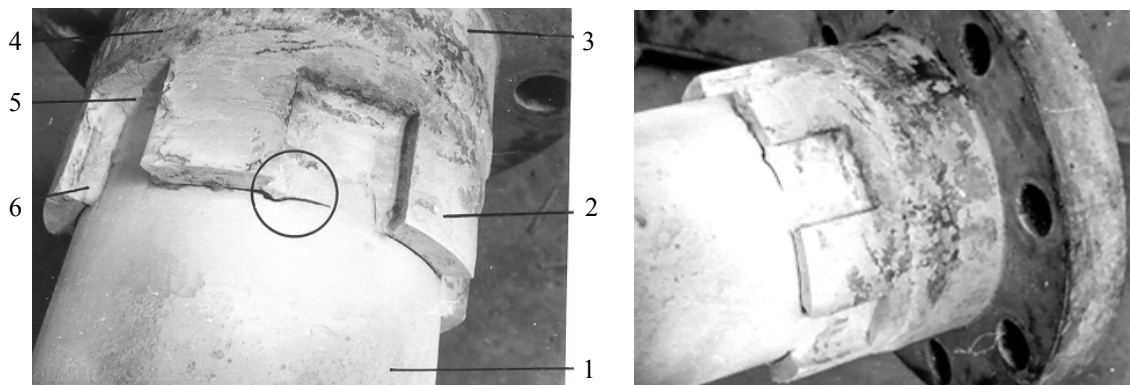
10 $\frac{3}{4}$ in drill pipe without airlift pipes, series 122: sight of zone with penetrated macro crack; 1 – drill pipe body; 2 – crenellated collar; 3 – flange; 4 – frontal weld seam between the flange neck and the crenellated collar; 5 – additional weld in the crenel inside basis; 6 – side corner weld at the crenel basis
